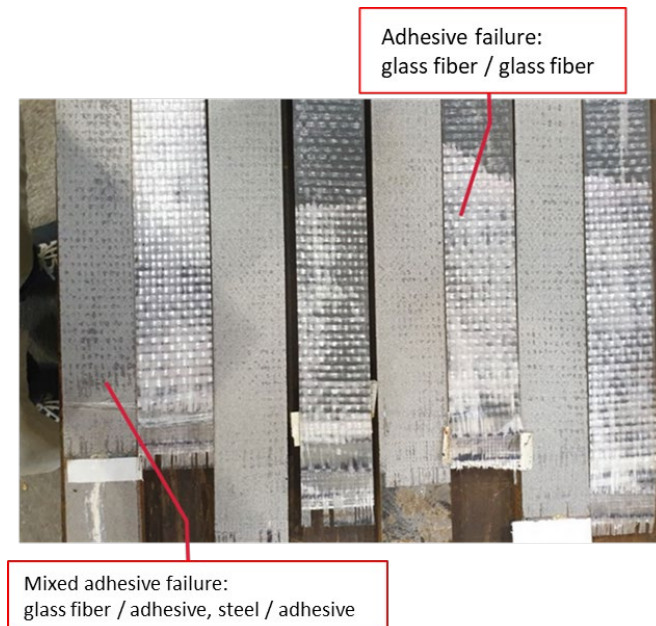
Fracture surfaces of tested samples in tension with long scarf.
